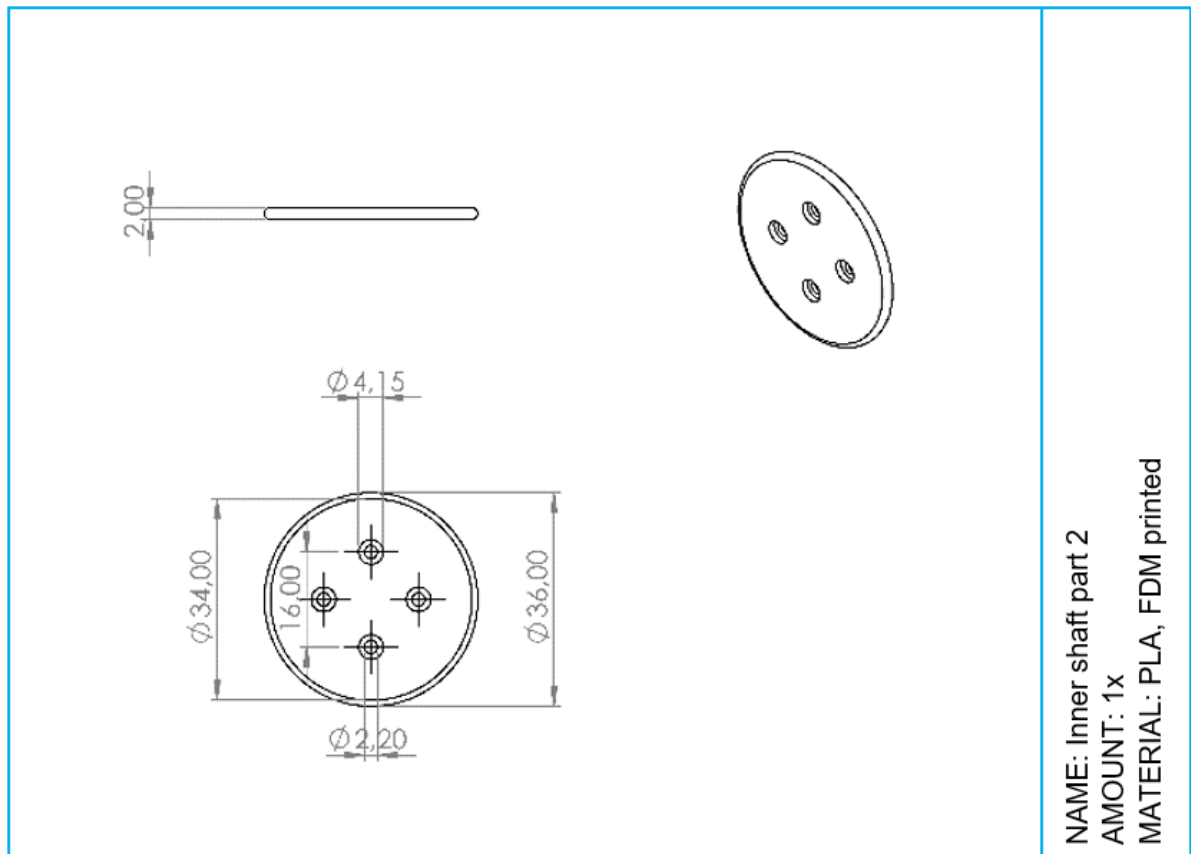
Construction drawings of the inner shaft part 2 - 3D Printed prototype
